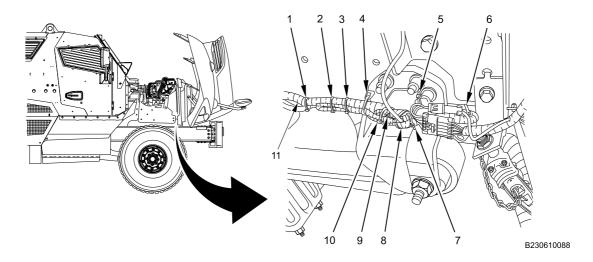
Front Bumper Right Harness Cable Lock Straps.
